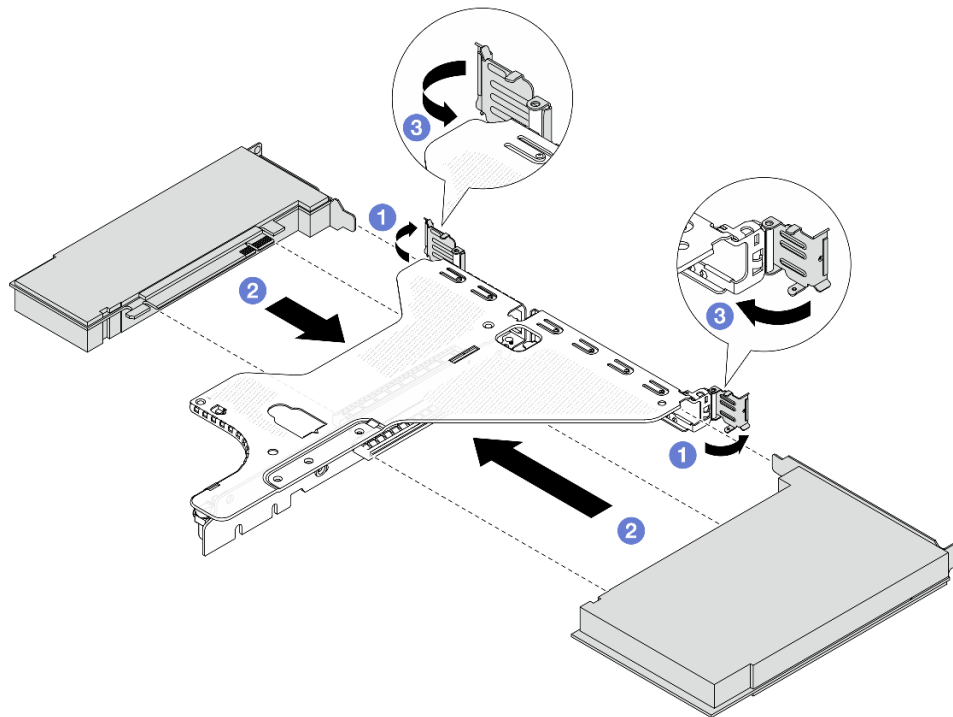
PCIe adapter installation into the LP-FH riser assembly
